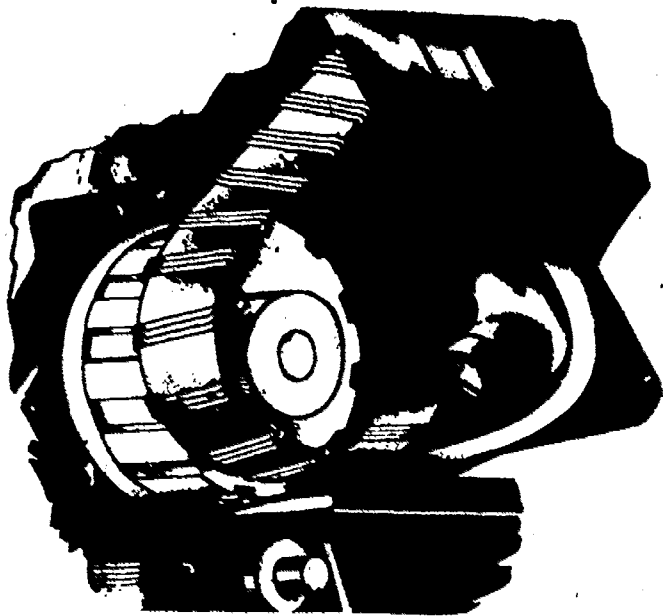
Removal of Arm Shaft Connection Belt from Lower Pulley
